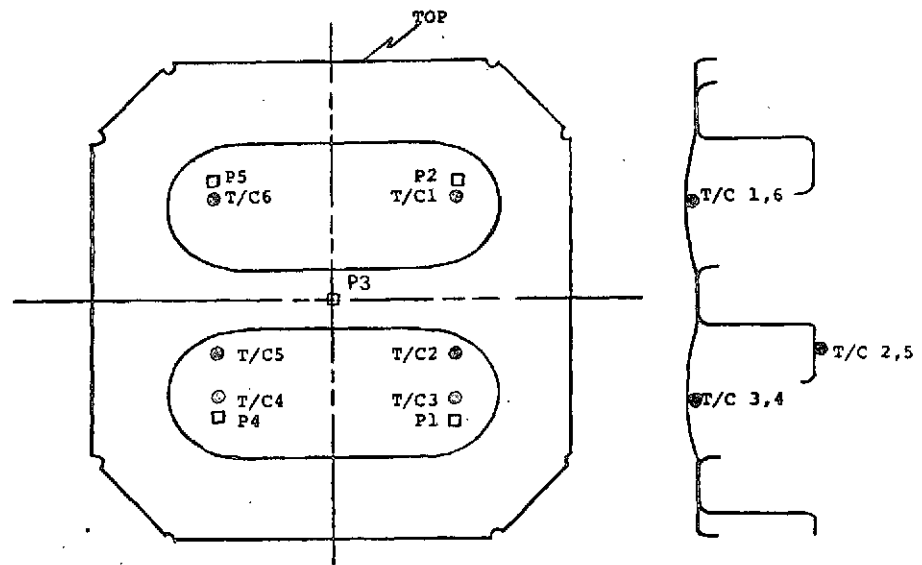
Instrumented Corrugation - Stiffened Panel Prior to Plasma Arc Tunnel Tests
